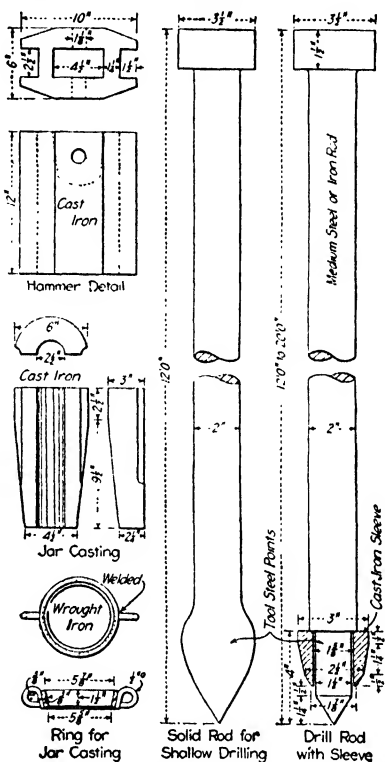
Details of Drill Rods and Hammer for Light Sounding Outfit.
